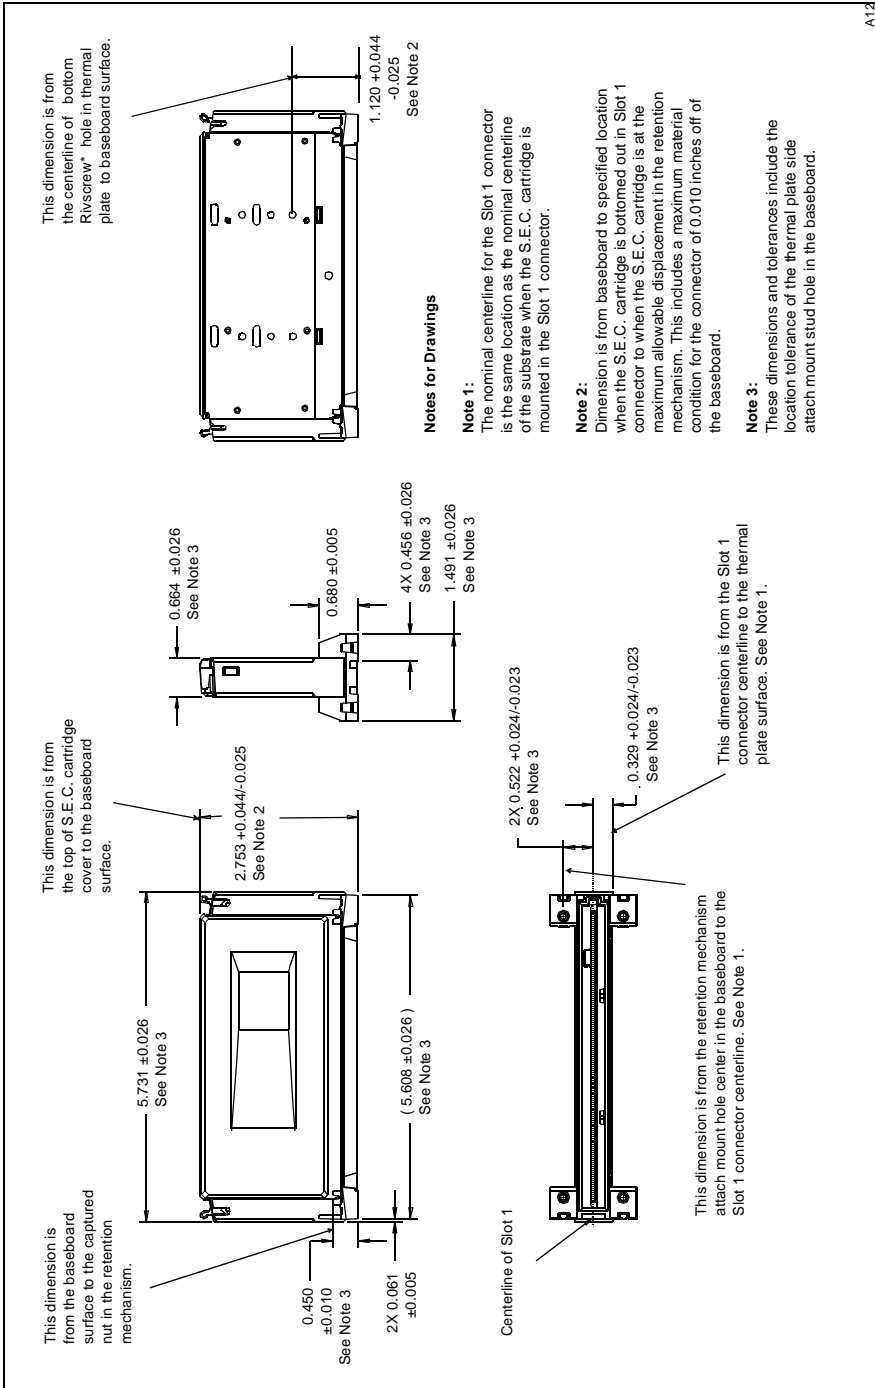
Retention Mechanism Assembled View, Thermal Plate Side View
